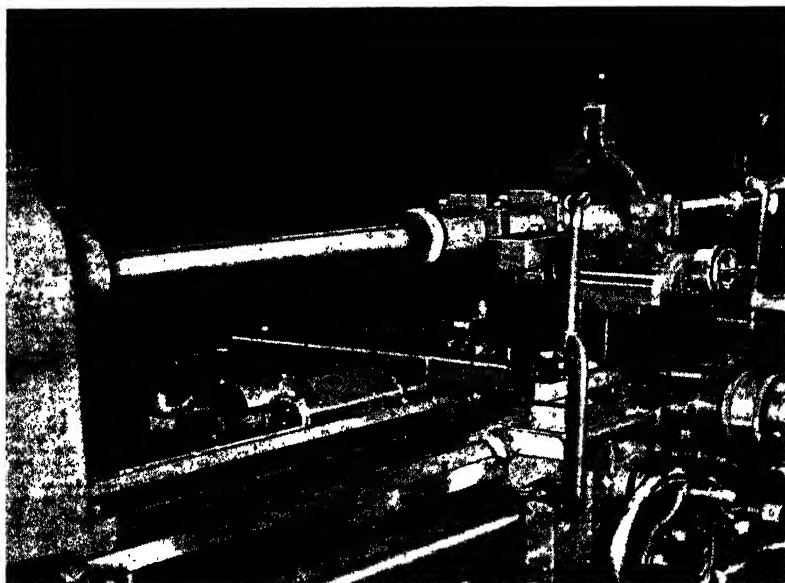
Turning Angular Surfaces of Bevel Gear Blanks
